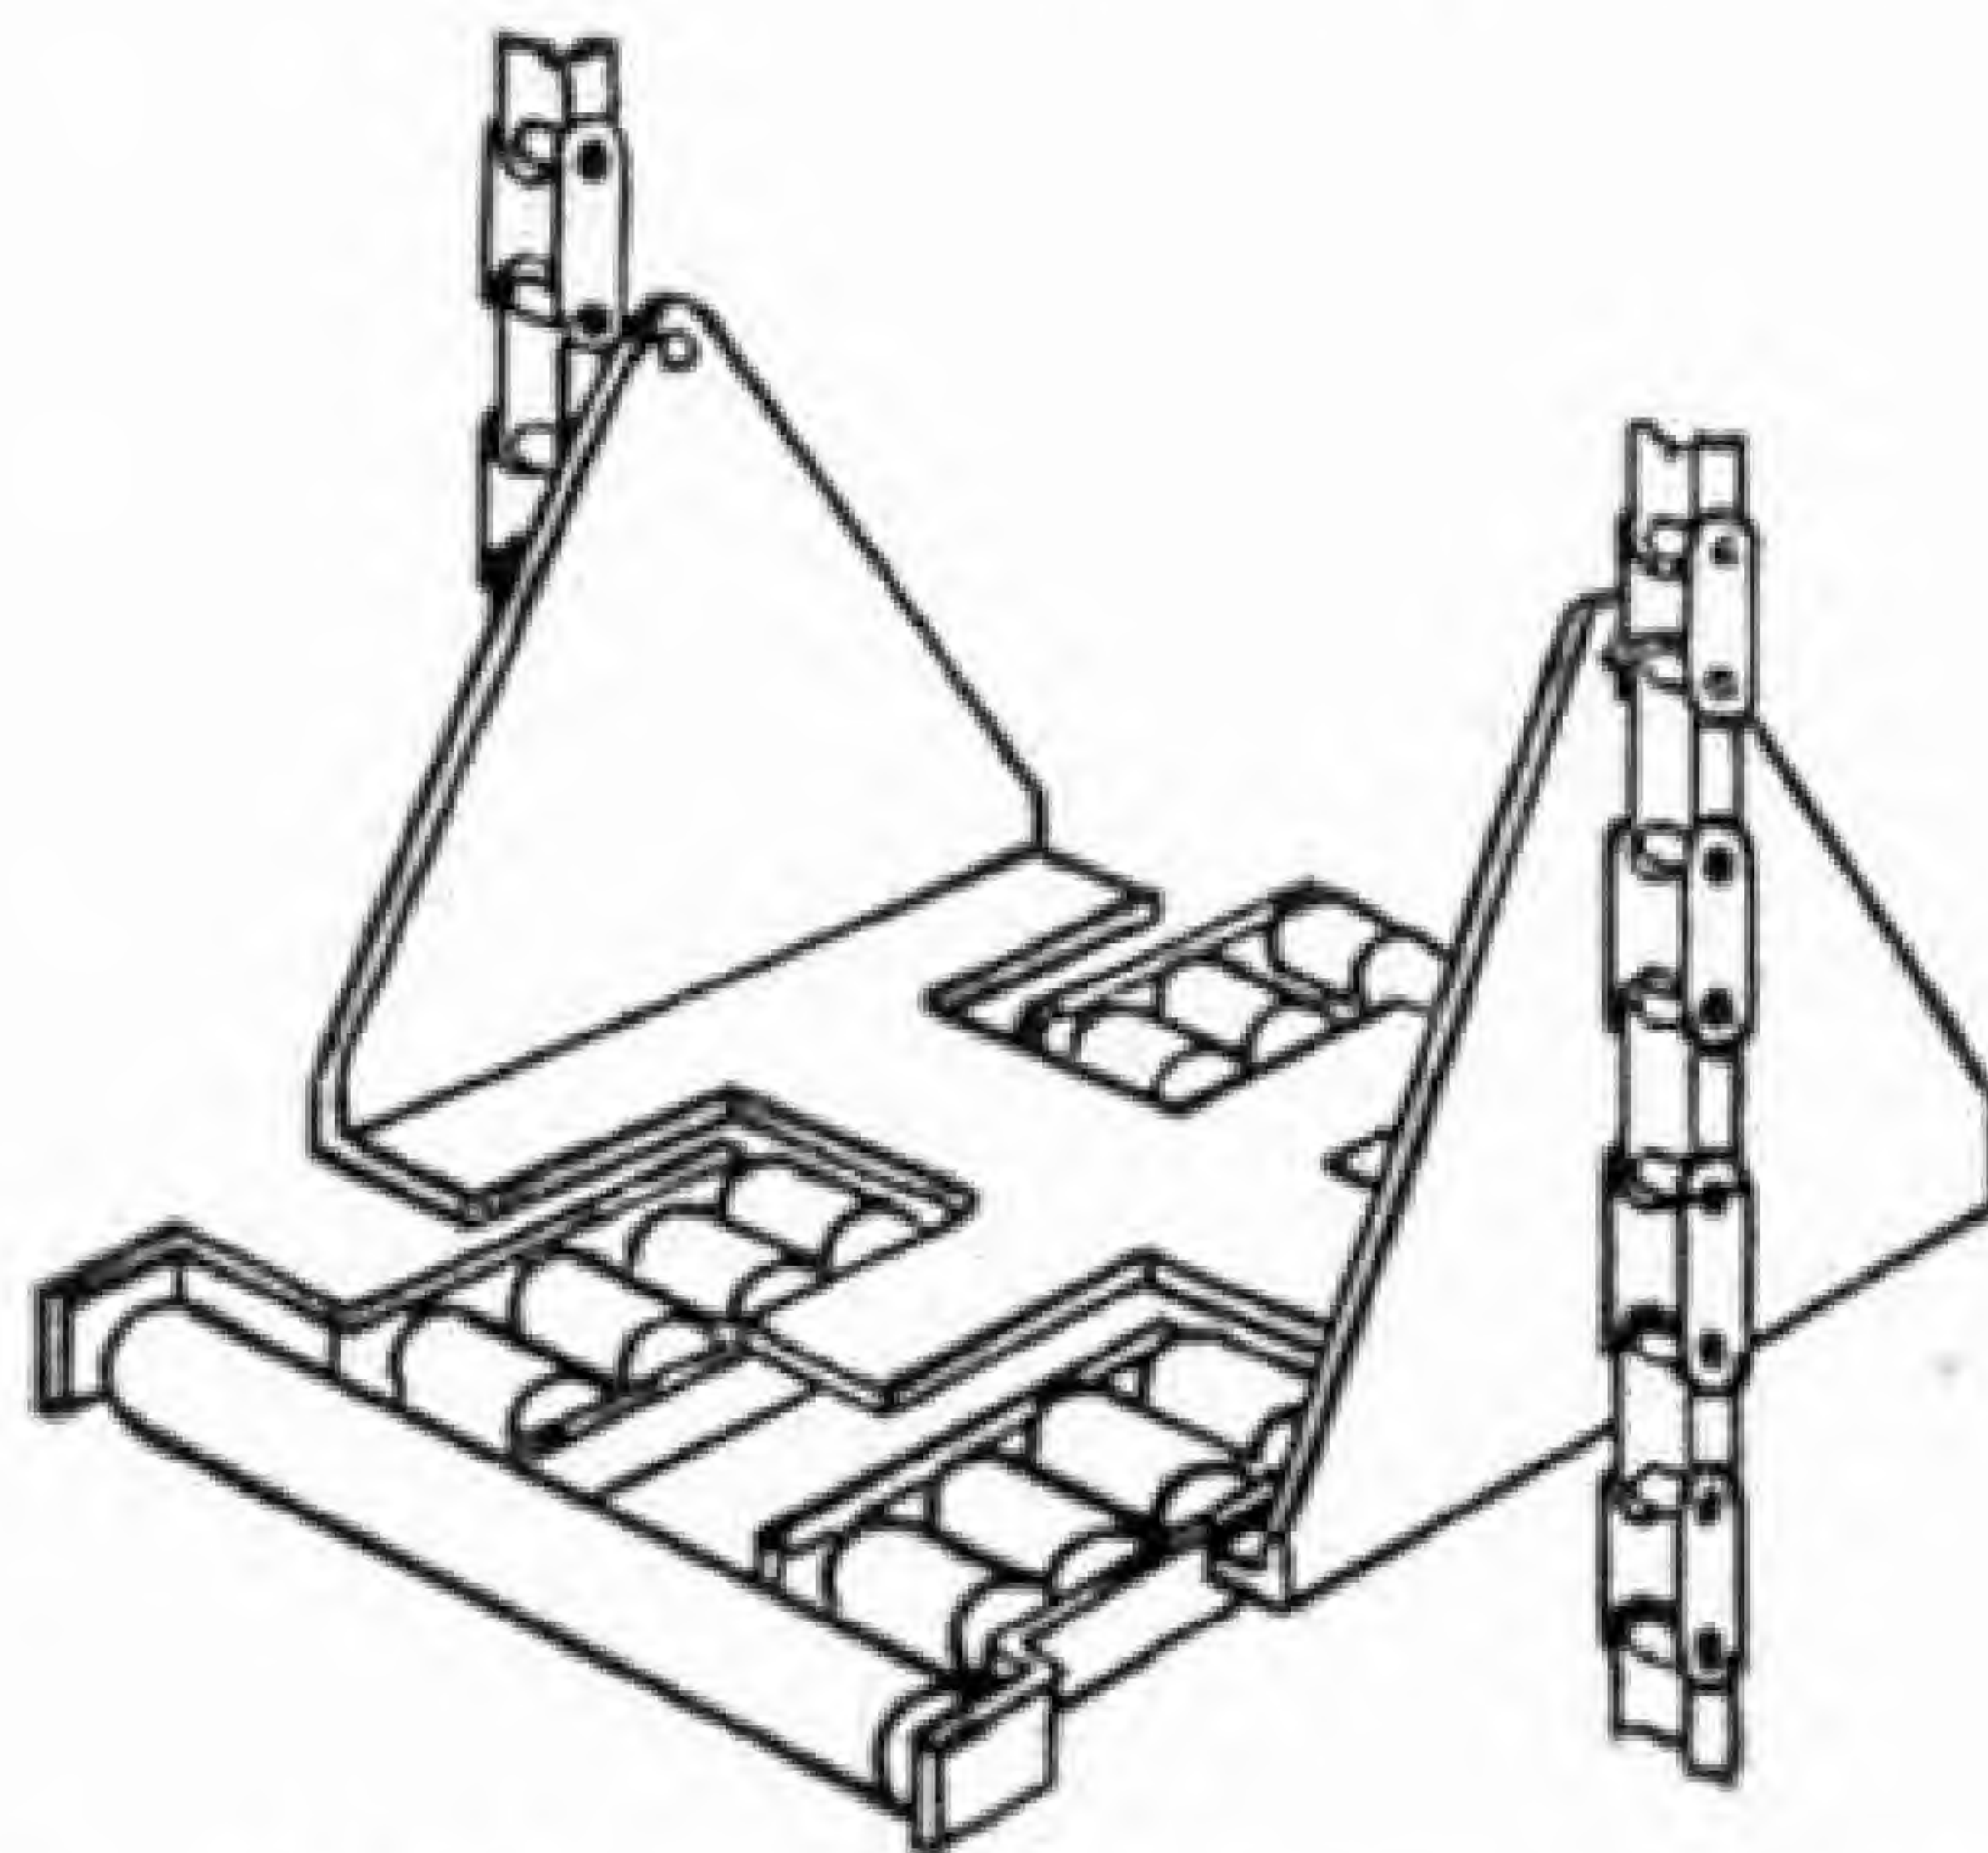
A load carrier passing through a "pick-up" grid, which consists of fingers fitted with rollers. The feed-out grid is similar but is inclined slightly so that the loads run clear.
